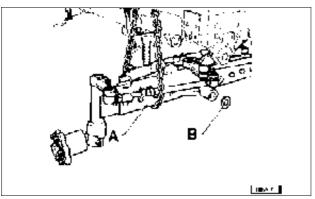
Remove the axle from the front support by tapping a few times the axle centre portion with the hammer. Lower axle A very slowly and make sure that no hindrance is produced during lowering, then remove shoulder rings B.
